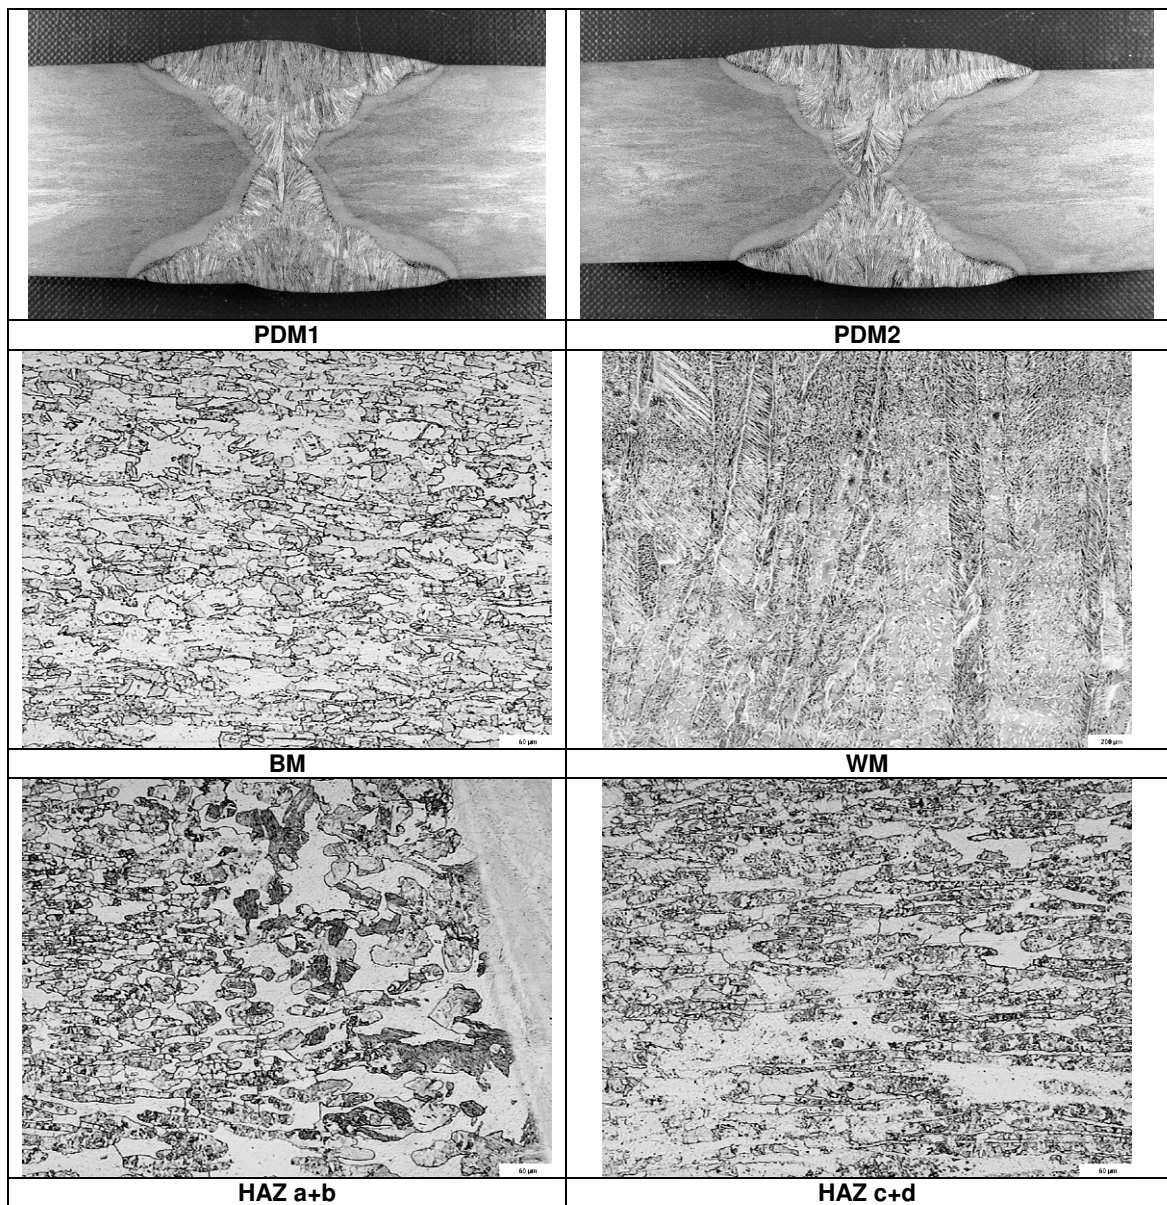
Macro and microphotographs of 30 mm thick SAW weld with duplex filler metal (PD).
